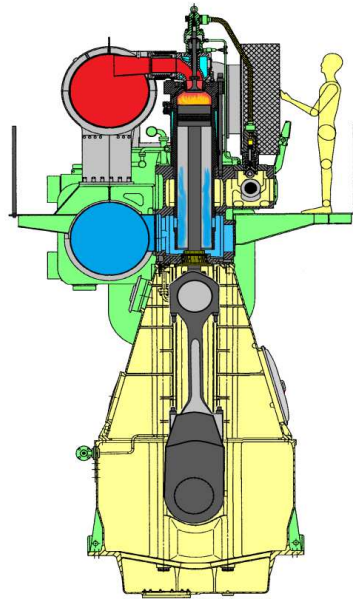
Man Engine Cross Section of S35MC7. Marine Type Modern Two Stroke Diesel Engine.
